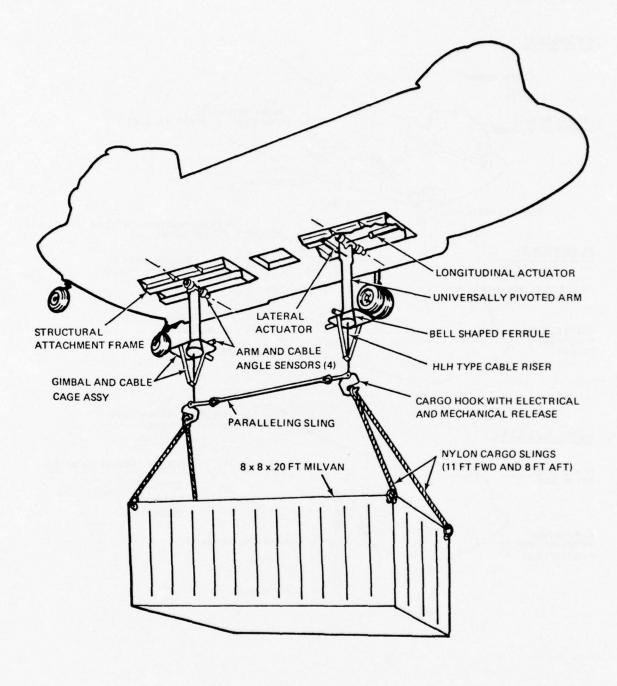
ACTIVE ARM EXTERNAL LOAD STABILIZATION SYSTEM (AAELSSII) TEST INSTALLATION
